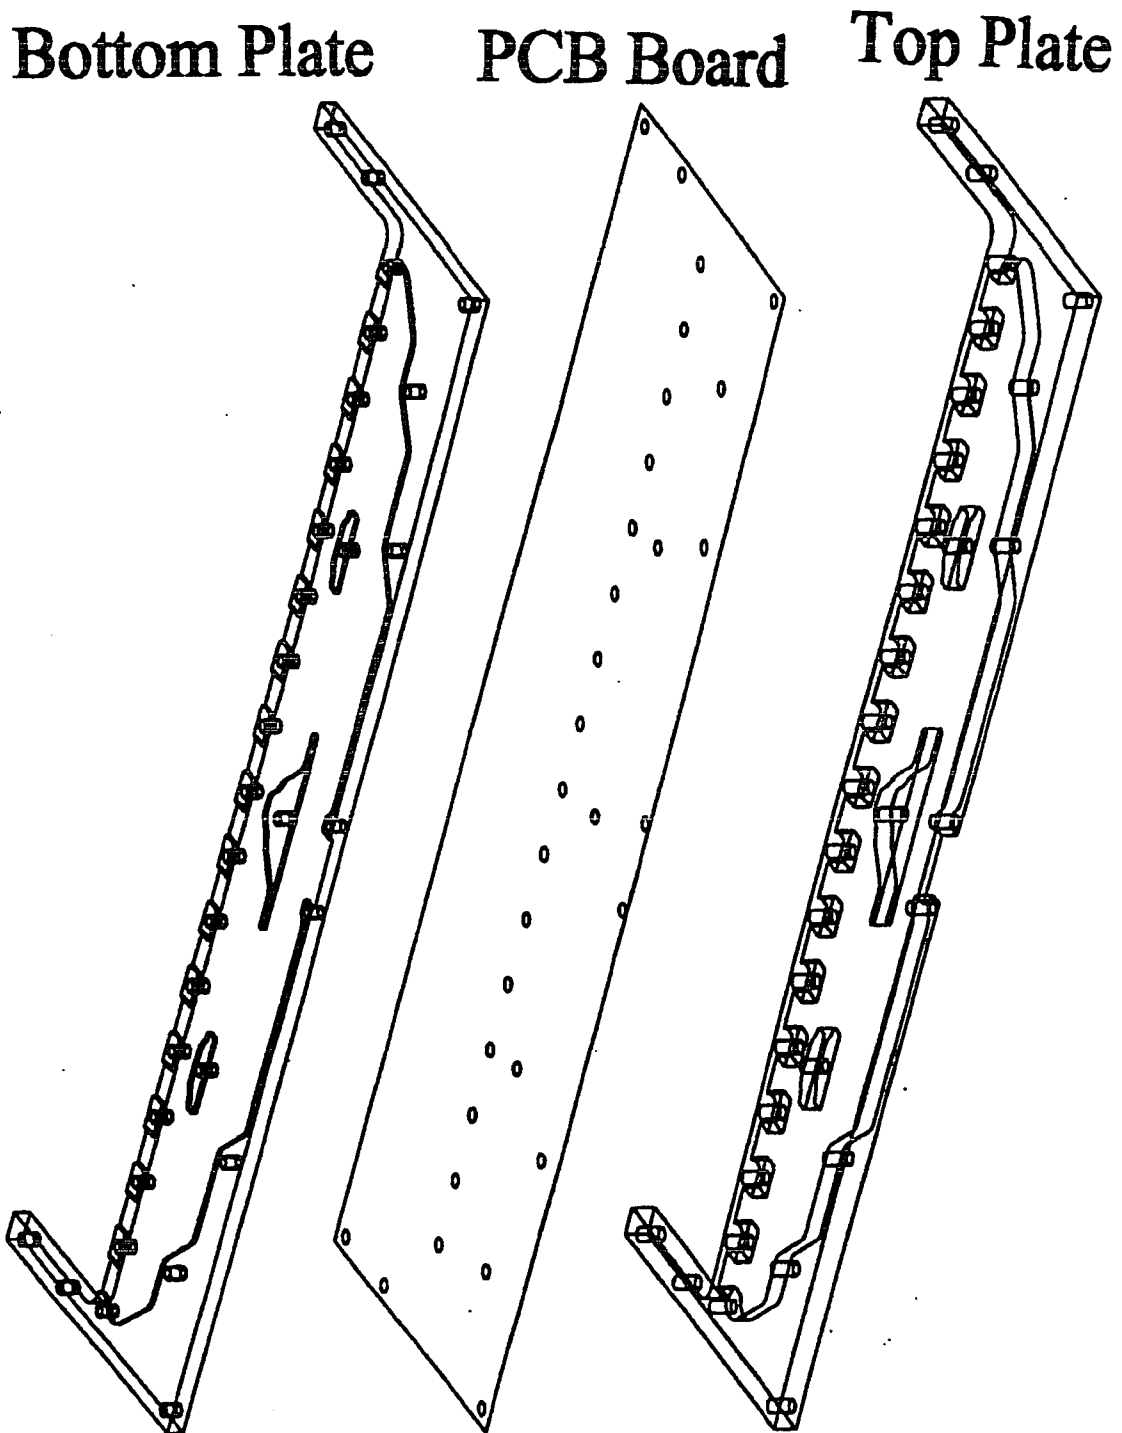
Three-piece assembly for the IML fed LTSA.
